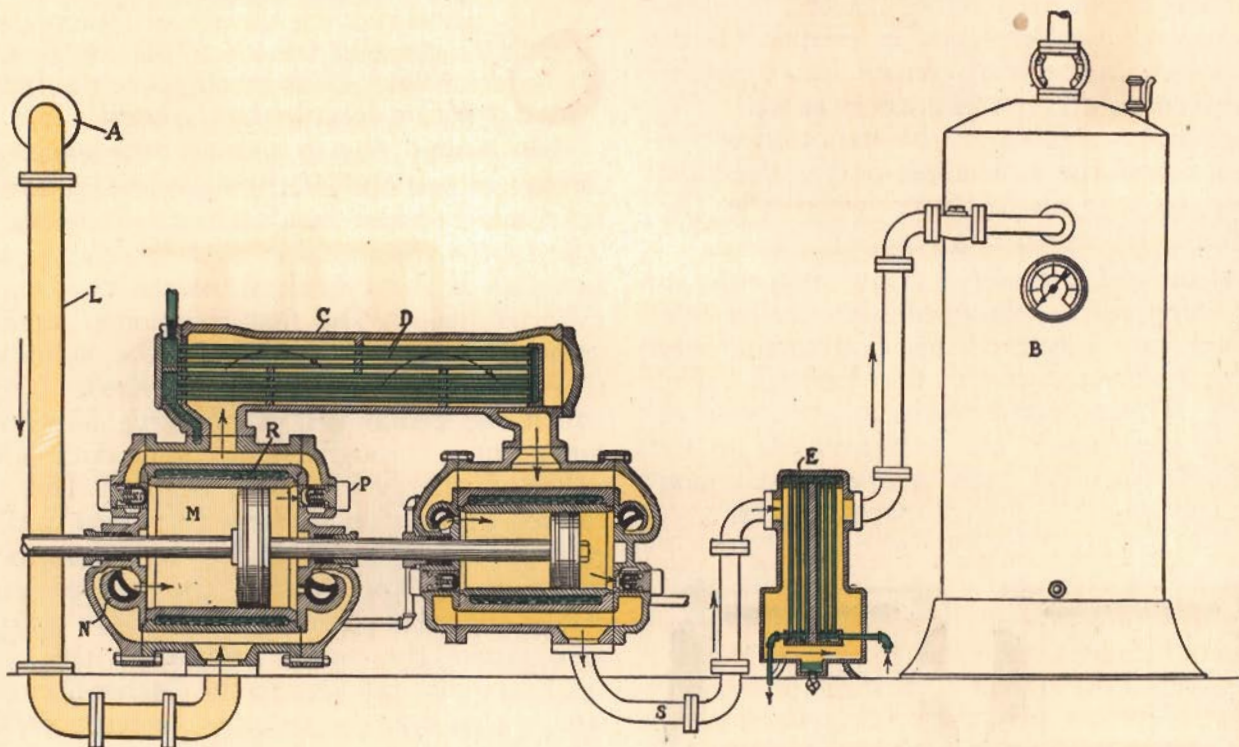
Section of a two-stage compressor in which the course of the air may be traced
